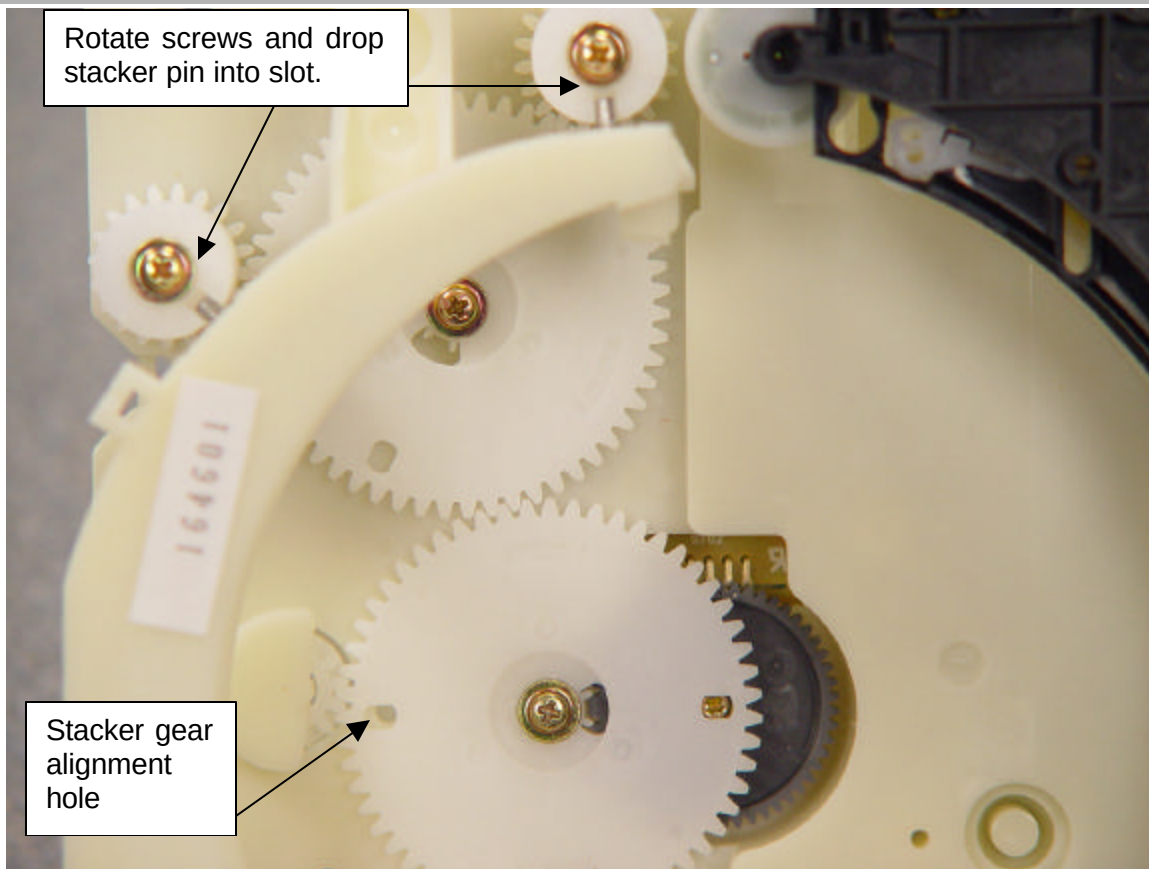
STACKER GEAR AND SCREW ALIGNMENT
